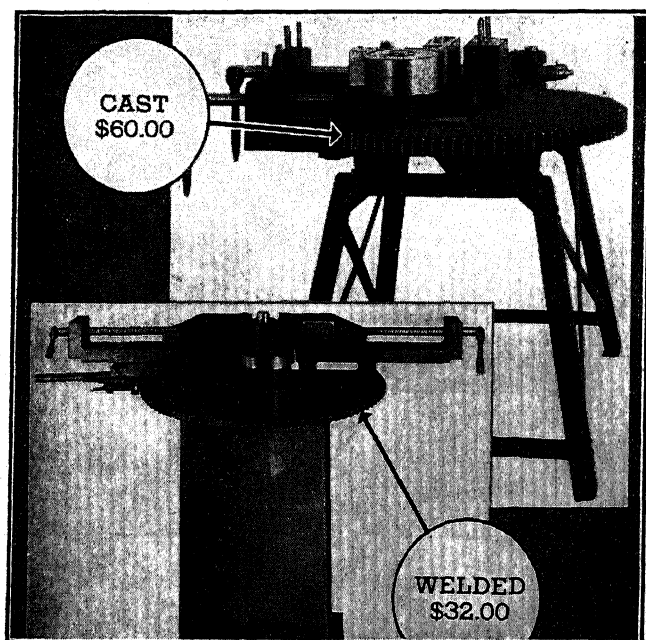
Redesign of this bar bending machine cut costs on every part. For instance, the cost of the rack top plate was reduced from \$60 to \$32. The weight of the machine was reduced from 1,250 lbs. to 736 lbs. The welded machine can be operated by one man, whereas the old one required two men. The improvement in appearance is apparent.
